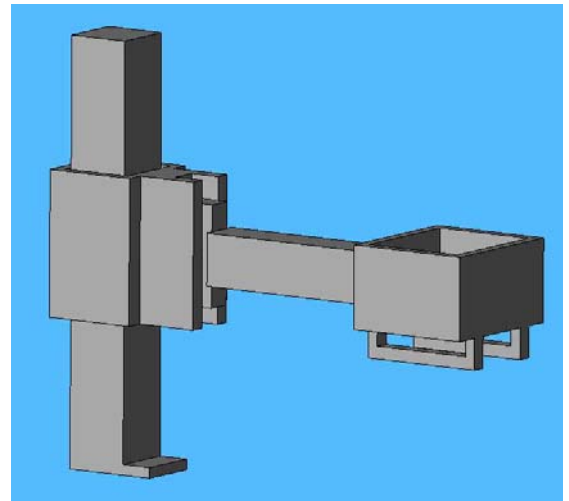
Proposed assembly for Microirradiator holder. The assembly consists of three parts, a base, bracket and a basket piece.
